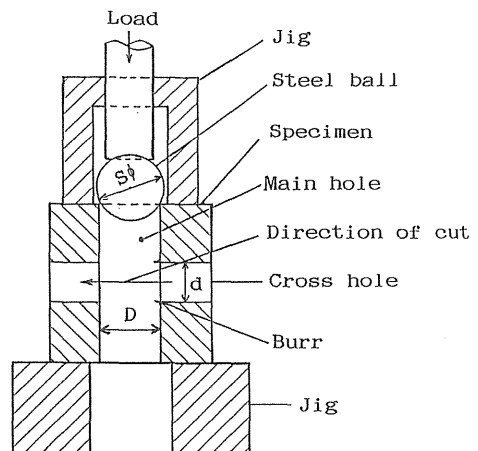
Set-up for deburring at cross holes by ball burnishing
